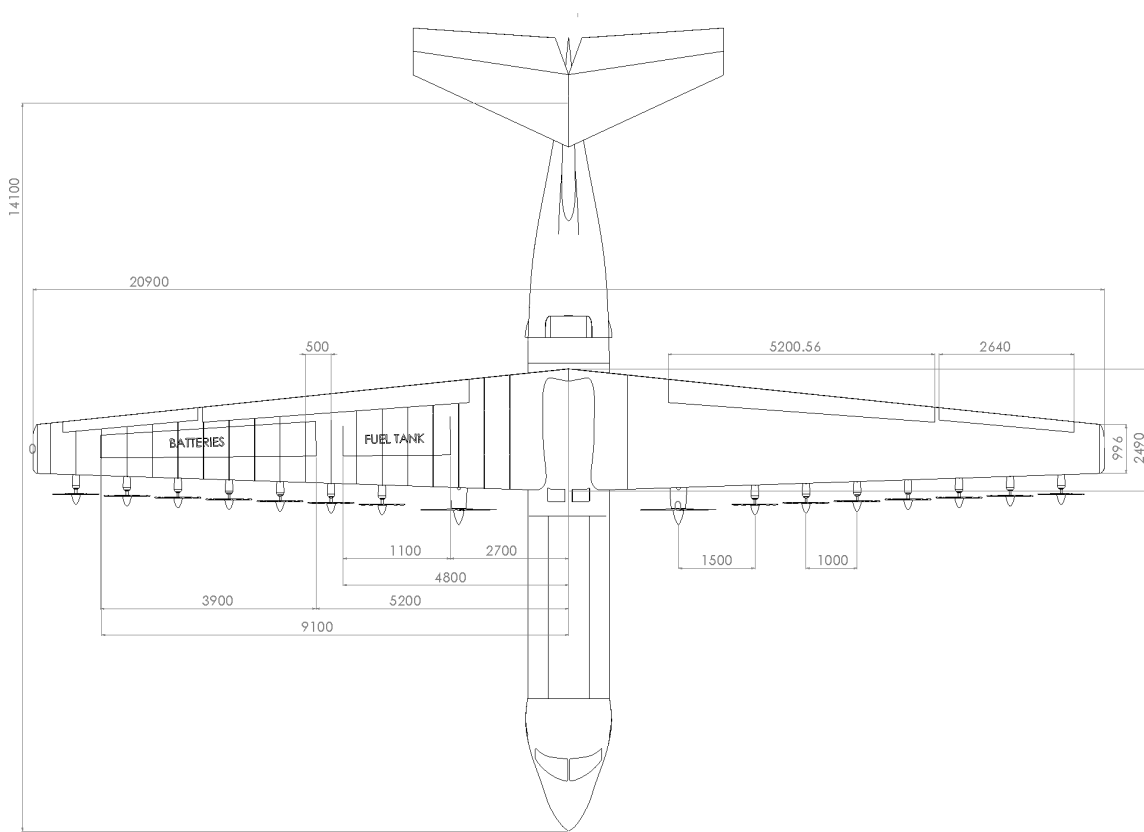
Top view of the E-Commuter (dimensions given in mm).
